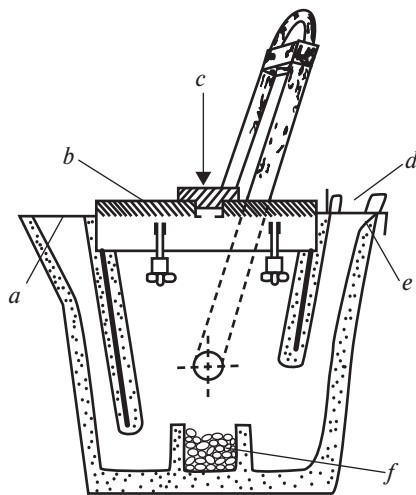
Teapot type ladle tandish cover with two ports for liquid cast iron [7]: *a* – outlet port; *b* – ladle cover with an edge grip of the ladle shell; *c* – cork (plug) used when filling the ladle with a modifier; *d* – filling port; *e* – reflecting plate; *f* – a spheroidizer (vermicularizer)
